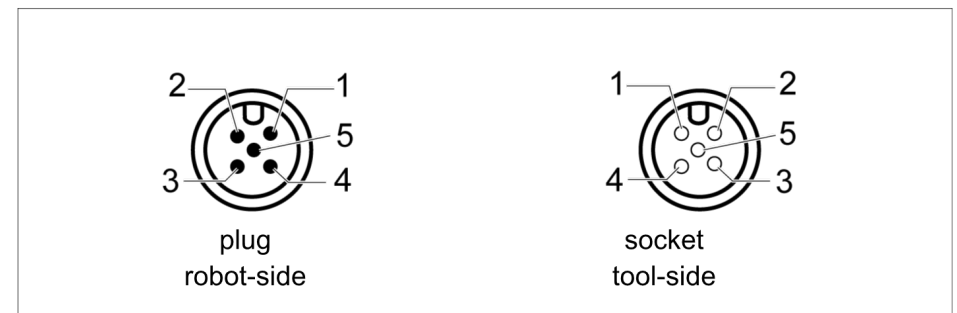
Pin allocation for M12 plug/socket (5-pin, B-coded)
